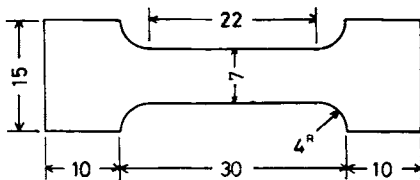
Dimension of 5-mm thick specimen used in fatigue test.
